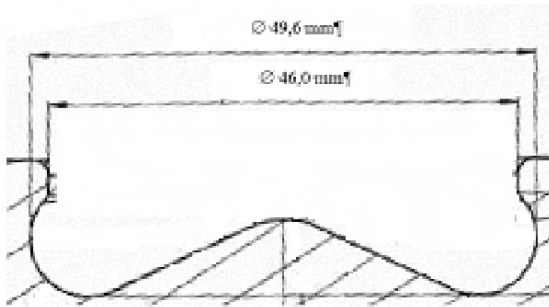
Piston bowl geometry A, with a piston bowl diameter of 49.6 mm and a piston bowl neck diameter of 46 mm
